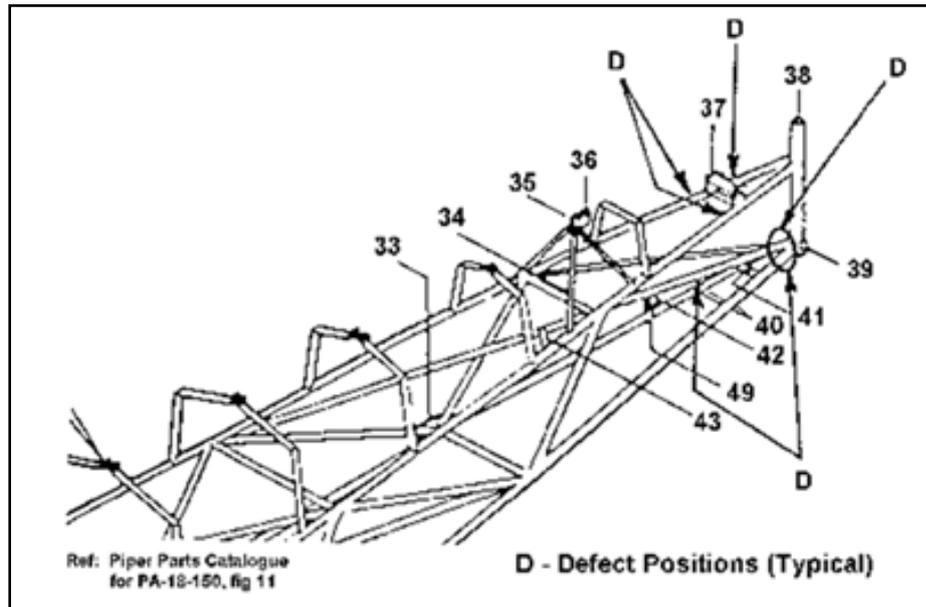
Piper PA18. Typical fatigue cracking sites in the aft fuselage.
